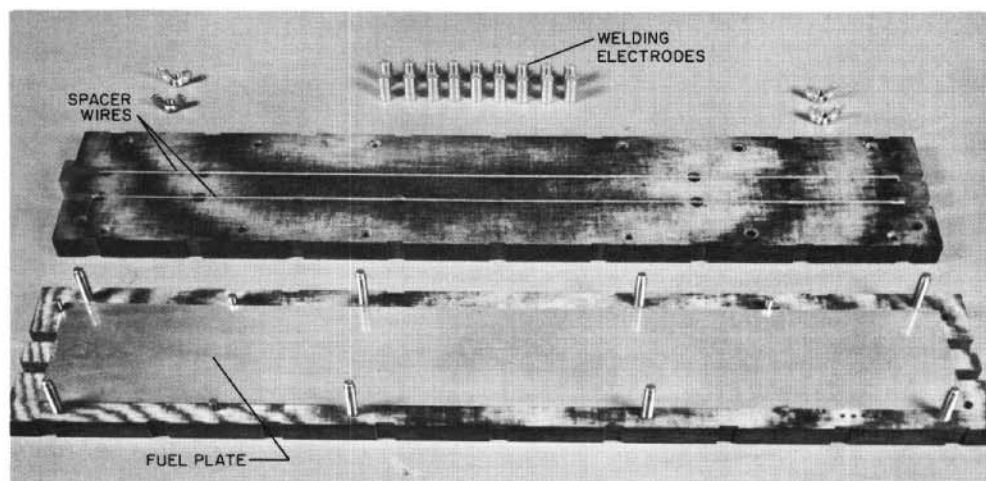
Fixture for Holding Fuel Plates and Spacer Wires during Tack Welding
